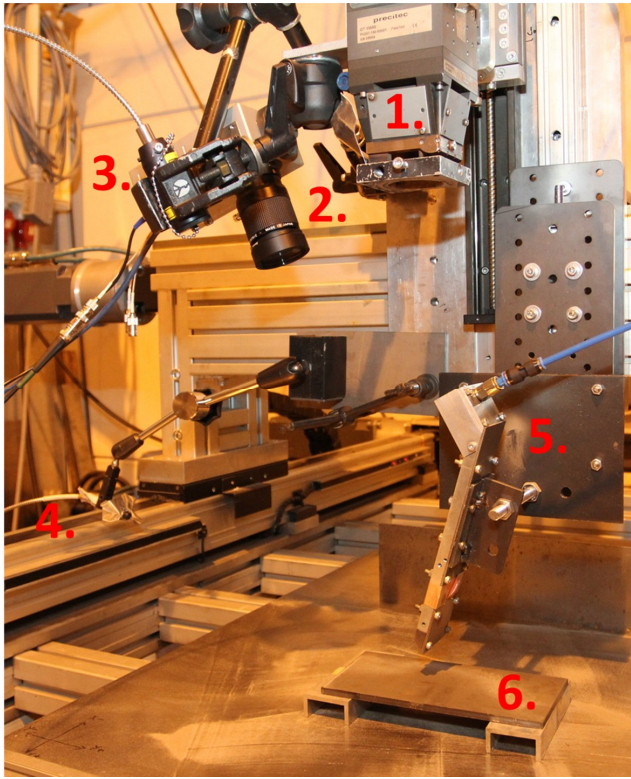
Experimental setup. 1. Precitec welding head. 2. High-speed camera. 3. Illumination system. 4. Spectrometer. 5. Powder feeding nozzle. 6. Workpiece.
